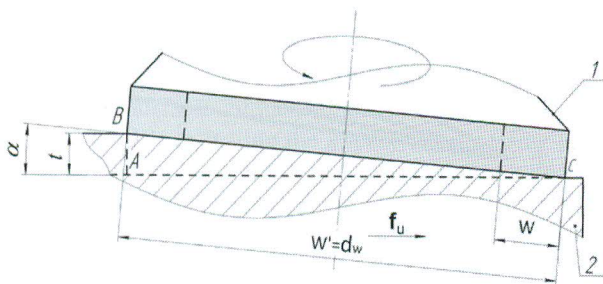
Case of full contact between WCS and workpiece (1 – wheel; 2 – workpiece)
